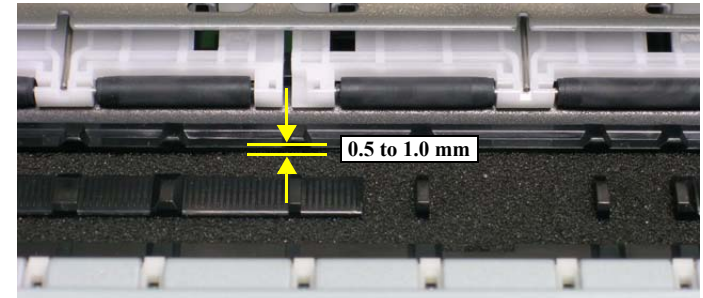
Reattaching the Front Paper Guide Porous Pad
